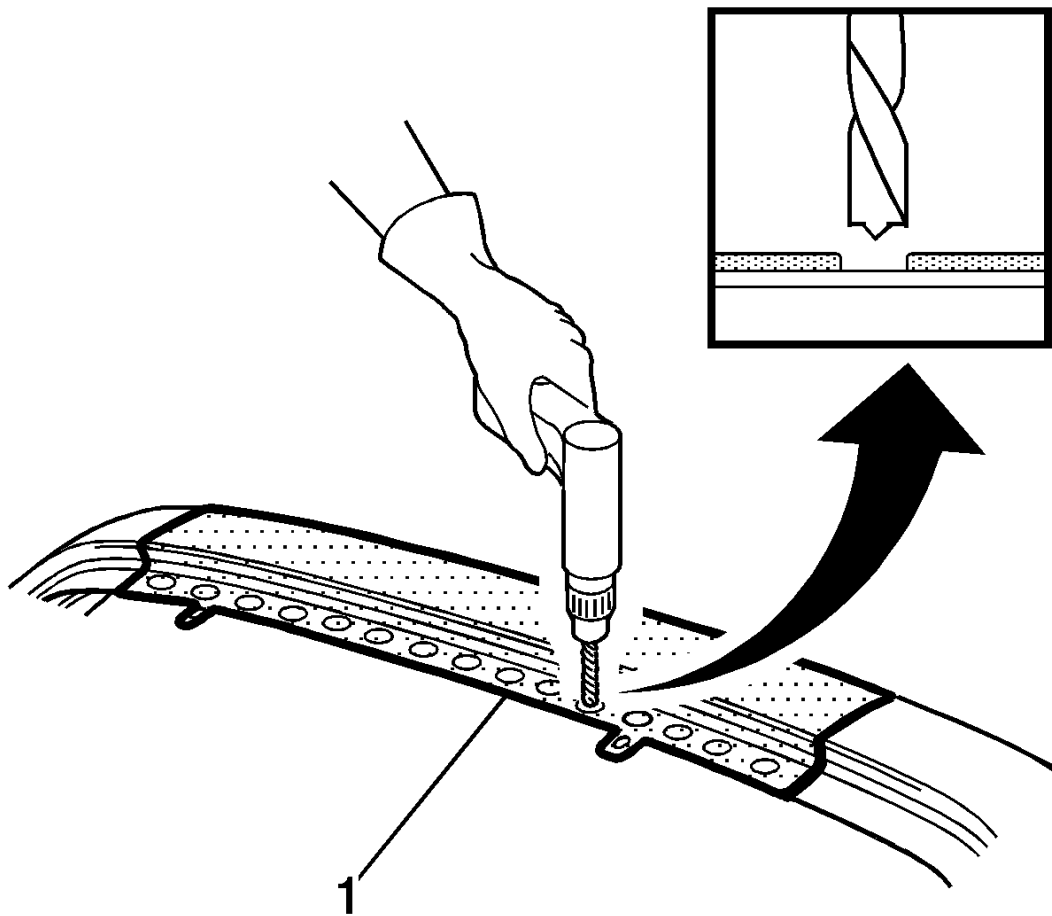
Drilling Out Factory Welds (Full Panel)
